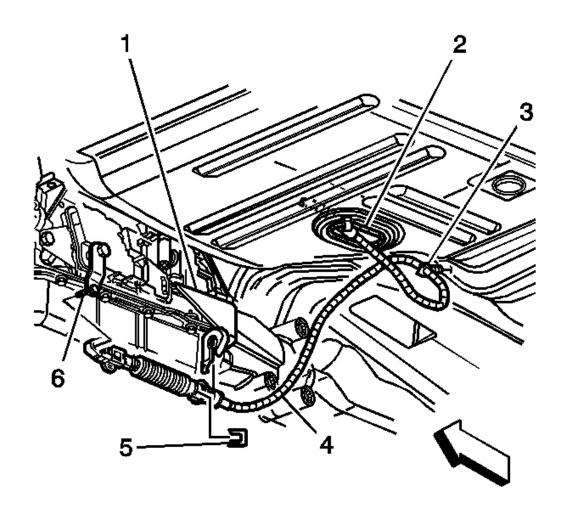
Identifying Range Selector Cable & Components Courtesy of GENERAL MOTORS CORP.
